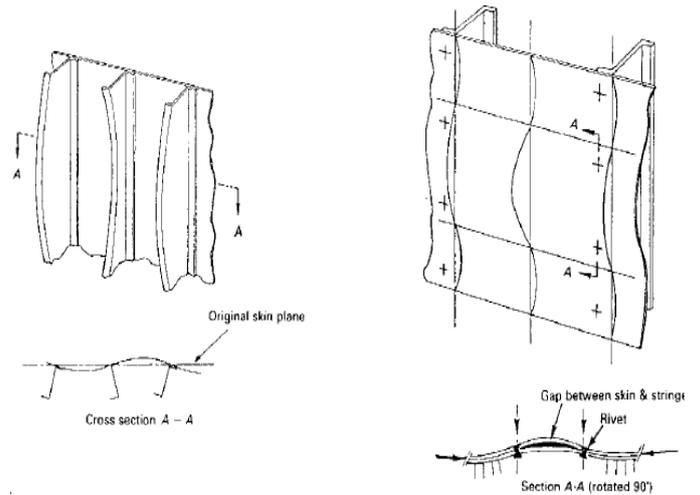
Torsional buckling of a skin-stringer panel (left) and Inter-rivet buckling and wrinkling of a skin- stringer panel (right)
